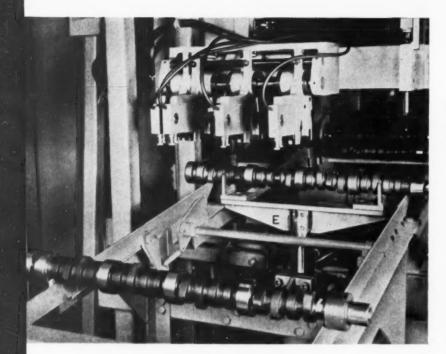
One of the electric gaging units which indicates specifically by panel lights any camshaft surfaces that have been turned either over or under size.
